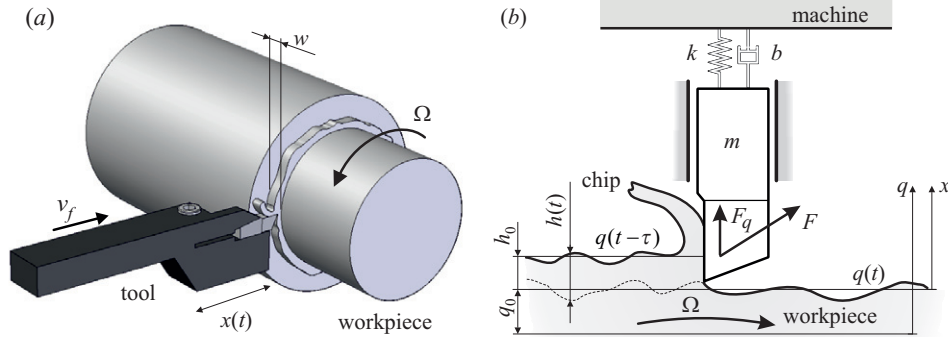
Panel (a) shows a schematic of the cutting tool in contact with the workpiece. The workpiece is rotating with angular velocity Ω and the tool enters the workpiece with feed velocity $v_f = h_0\Omega/(2\pi)$. Panel (b) is a graphical representation of the model (2) where the forces on the cutting tool are proportional to the chip thickness $h(t) = q(t - \tau) - q(t) + h_0$, where $\tau = 2\pi/\Omega$ is the period of revolution.
